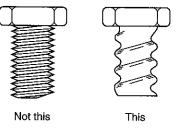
Shallow screw threads can sometimes be stripped directly from the mold.
